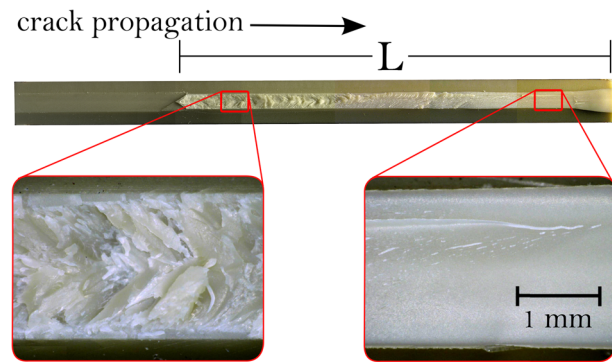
Microscopy image of PEEK specimen fracture surface. *Left* First part of crack surface, rough with complex structures. *Right* Much smoother surface at the end of the crack. Full crack length for one fracture event
